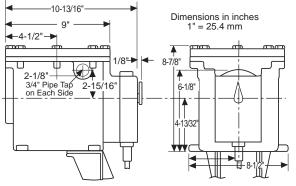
Hazardous Location Housing Mounting Dimensions for Valve Actuators (See Valve Data for Valve Dimensions)
